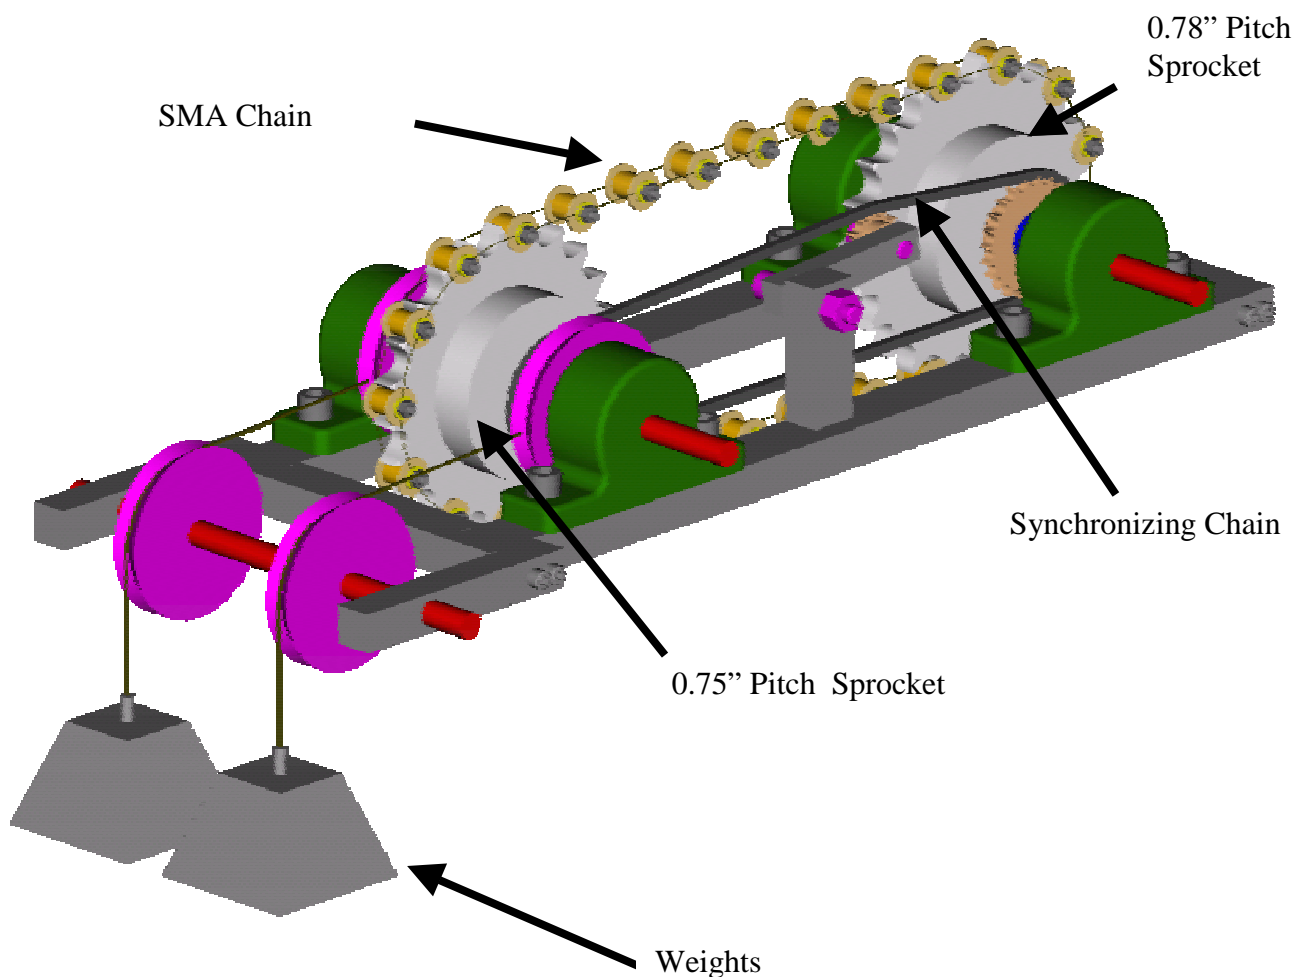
3D Representation of the VT1 heat engine assembly
